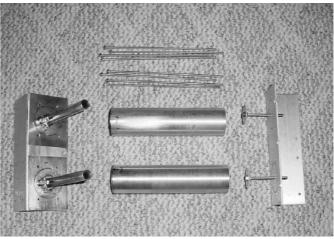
Photo F — The copper pipe assembly, aluminum tube "cans" and all thread rods are laid out ready for assembly. The bandpass adjustment capacitors have been installed in holes in the second aluminum angle bracket.
